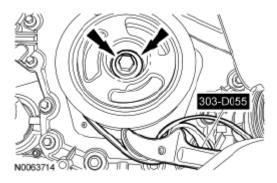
Locating Crankshaft Pulley Washer And Bolt Courtesy of FORD MOTOR CO.
